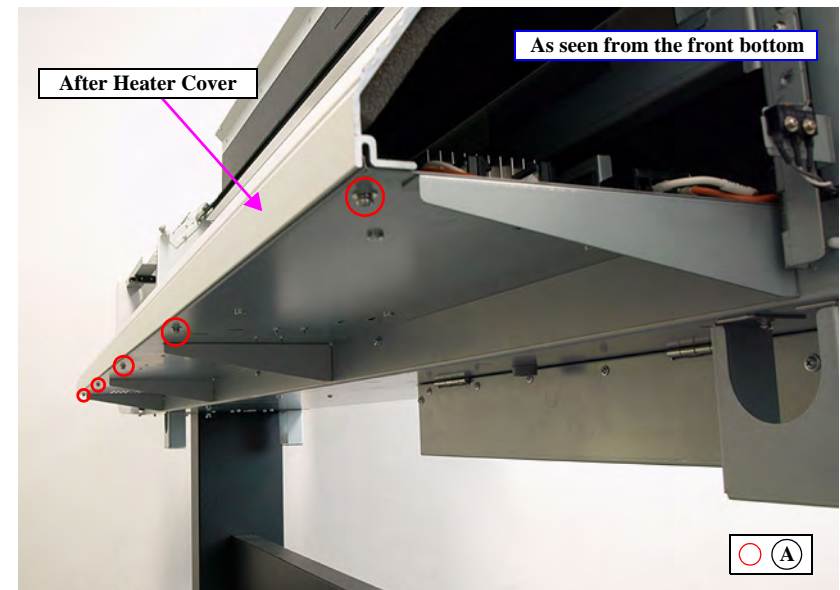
Removing the Screws of After Heater Cover (bottom)
